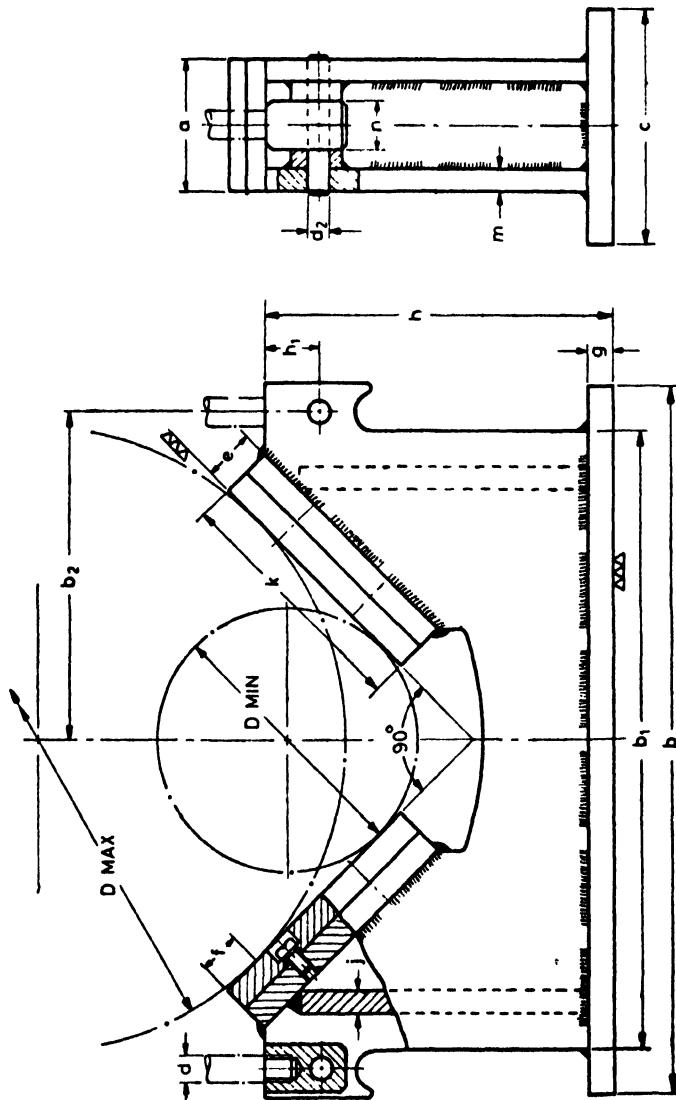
DIMENSIONS FOR V.BLOCKS, SIZES 700 AND 1 000 mm
